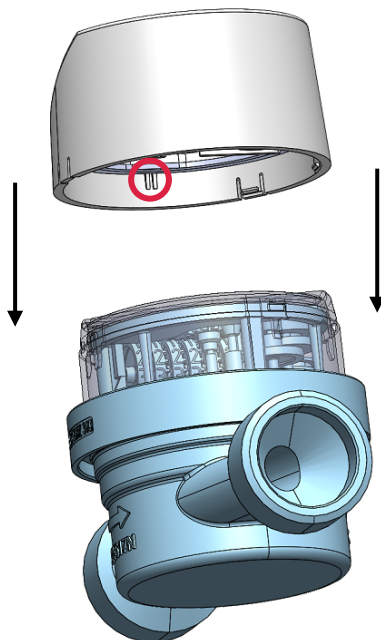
View of the OP-O4-1b module, before mounting on the JS Smart + water meter.
